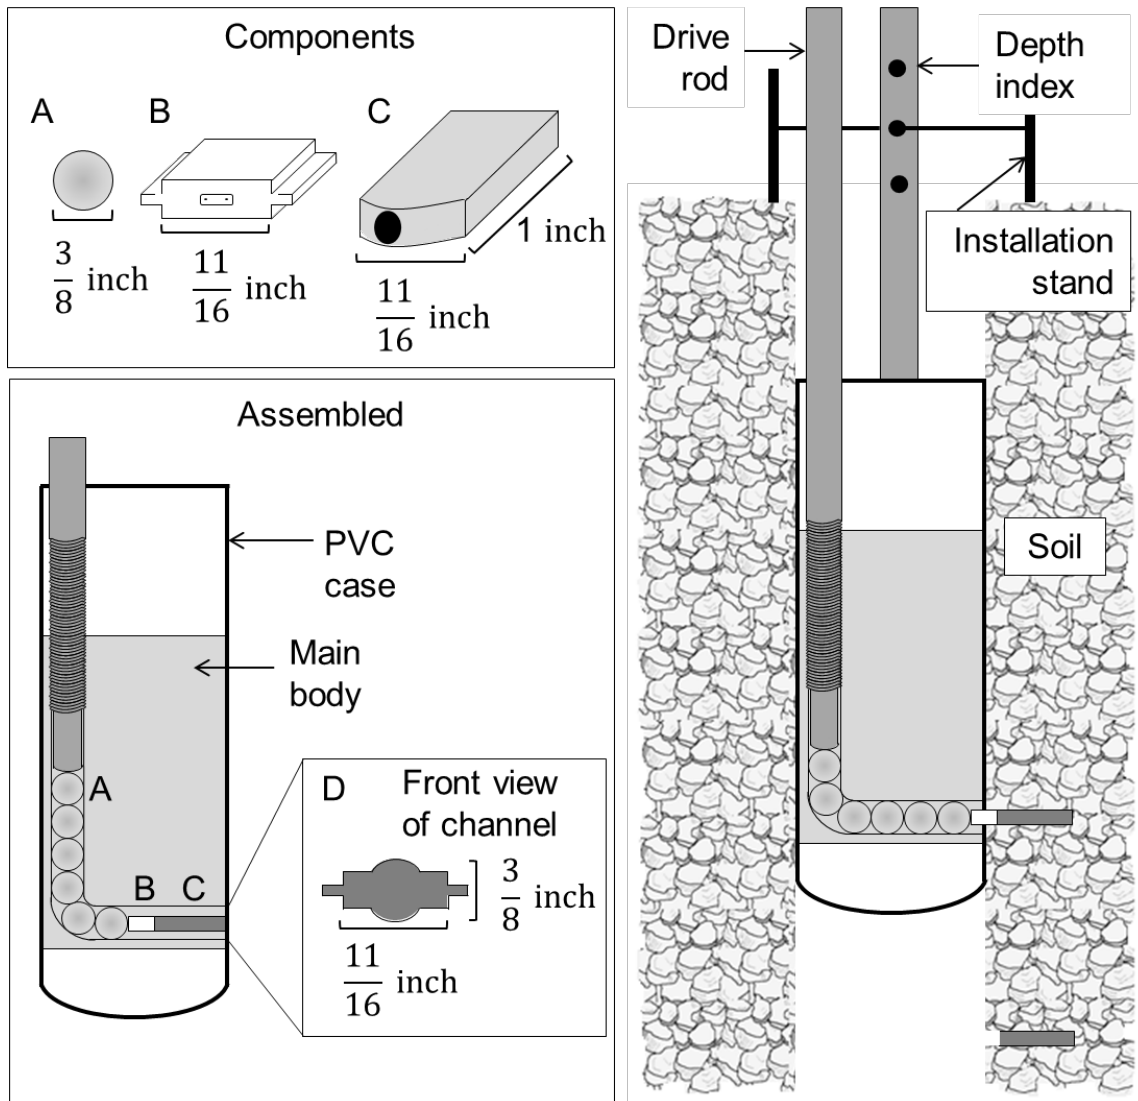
Diagram for magnet inserter. Components include A) ball bearings, B) push plate, C) aluminum-sleeved magnet, and D) front view of magnet inserter channel. A threaded drive rod is used to generate the necessary force to move components and push the magnets into the soil, and magnet position from the soil surface is set with a depth indexed rod with an installation stand.
